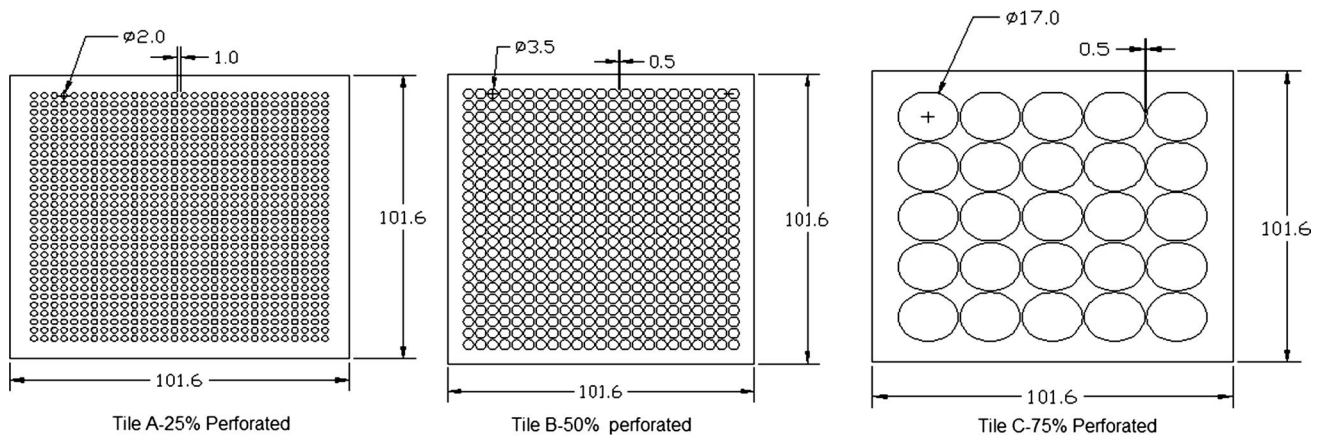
Tested perforated floor tiles (dimensions in millimeters)
